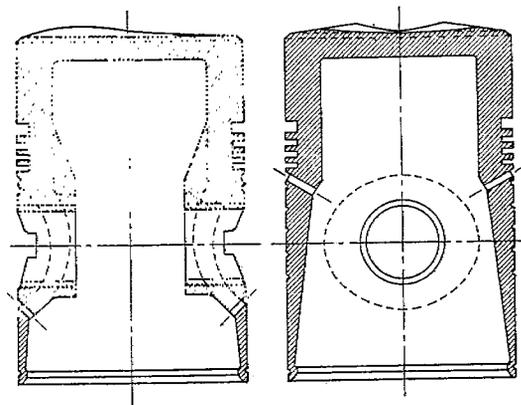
Sectional views of piston 14 (magnesium alloy)
